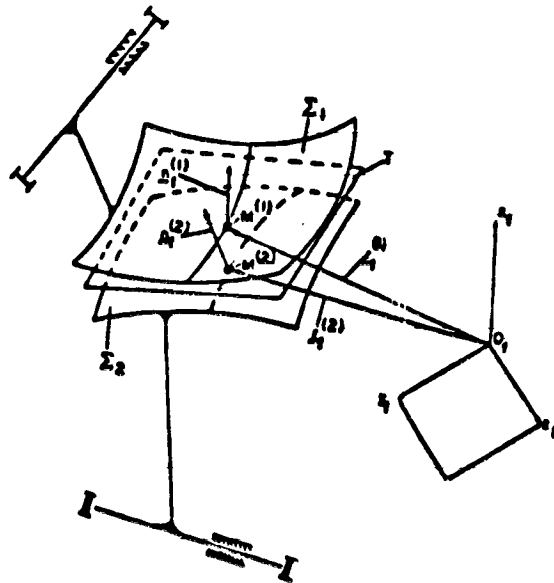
TOOTH SURFACES WITH CLEARANCE INDUCED BY ERRORS.
